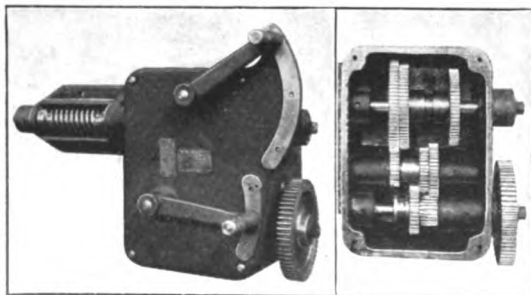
OIL-TIGHT SPEED GEAR BOX
